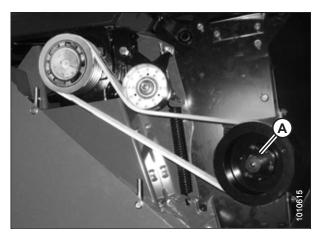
Drive Belt and Pulleys on Left Side Pull-Type
